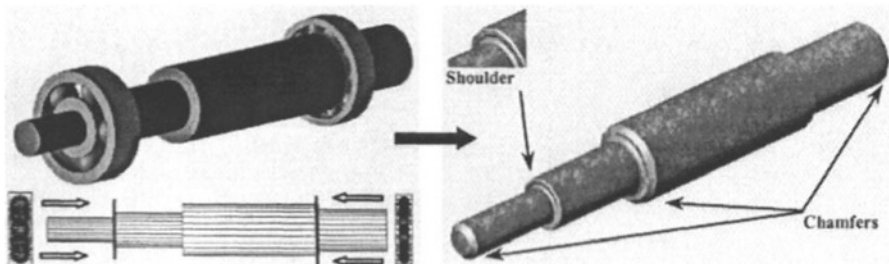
Shaft with bearings and detailed model (Solid Edge)
